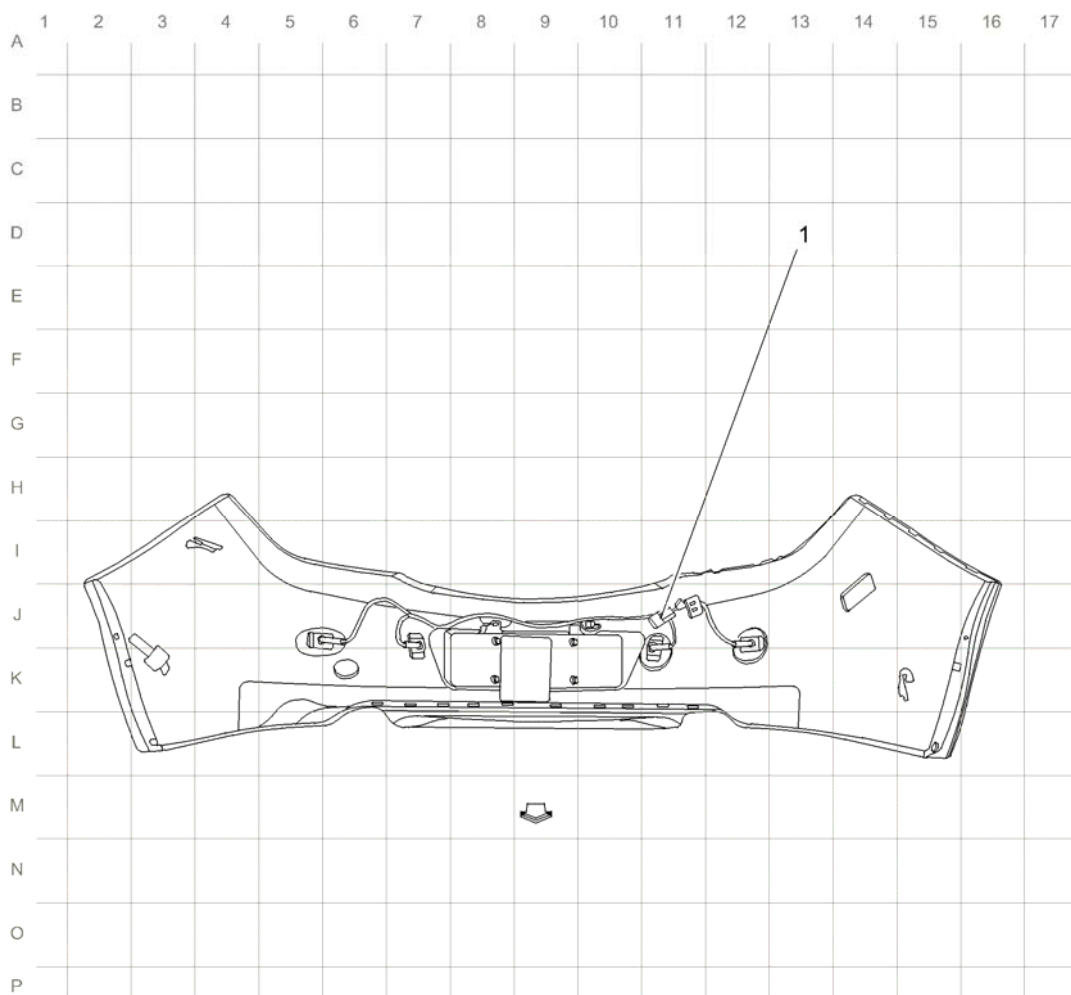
Rear Bumper Wiring Harness Routing (UD7)
